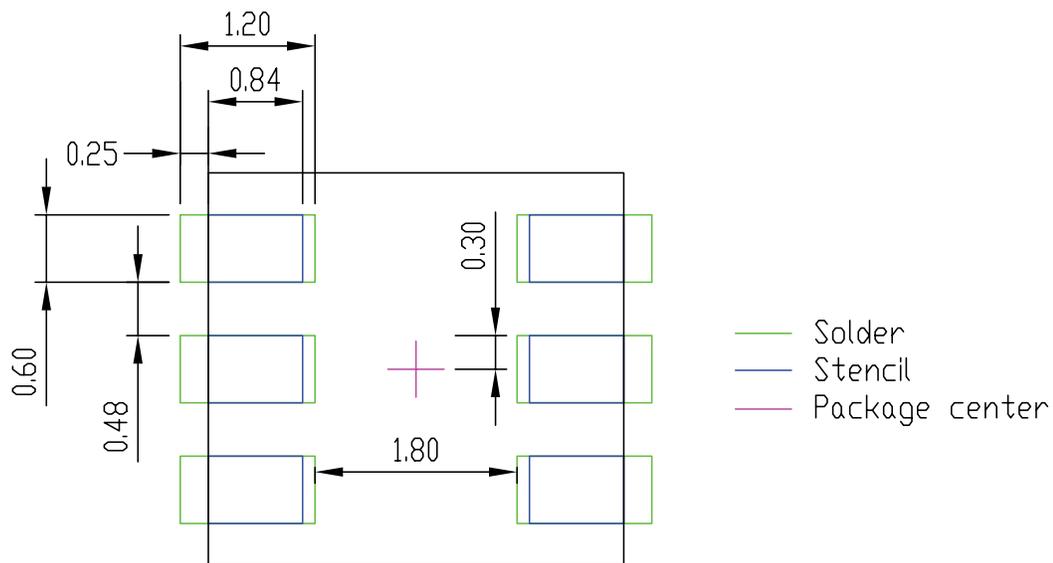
Recommended PCB solder pad layout for LUXEON 3735 RGB.
